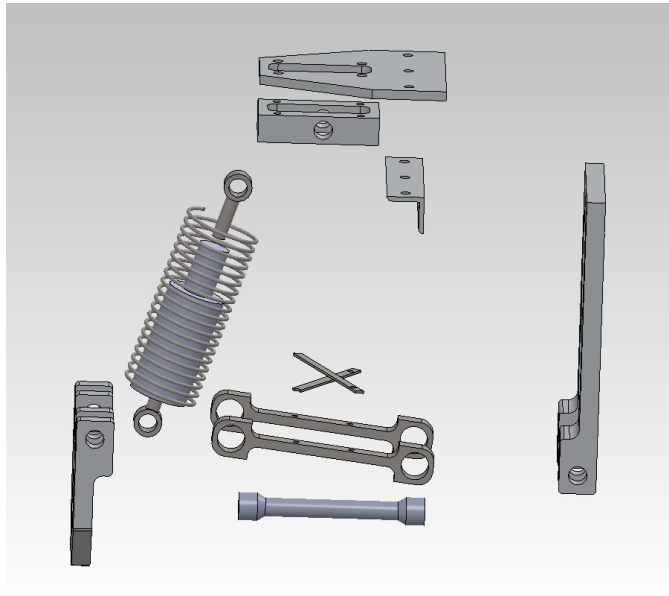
Exploded side view of the suspension module, without a wheel.
